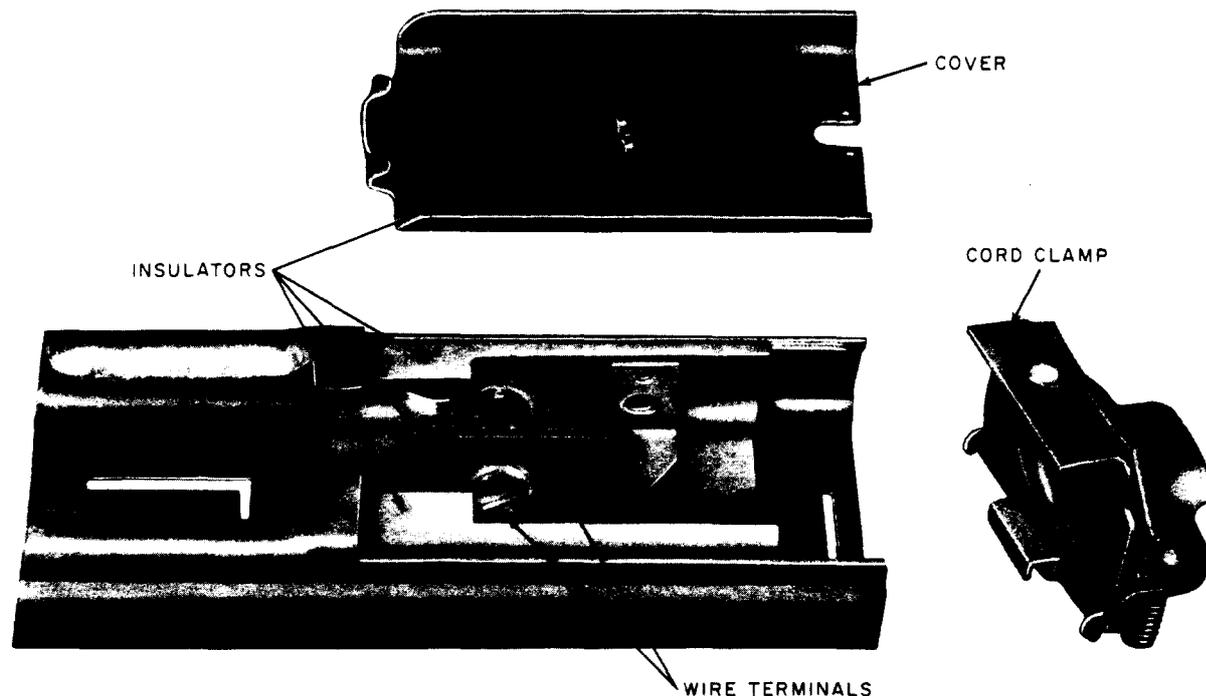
KS-20085 L8 Duct Feed-In End Cap (Disassembled)
